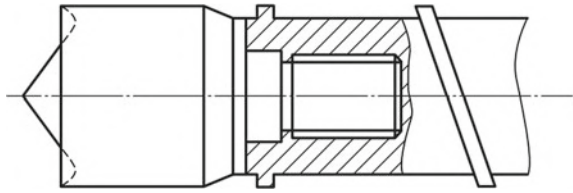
Sectional drawing of flat-tip screw head installed
